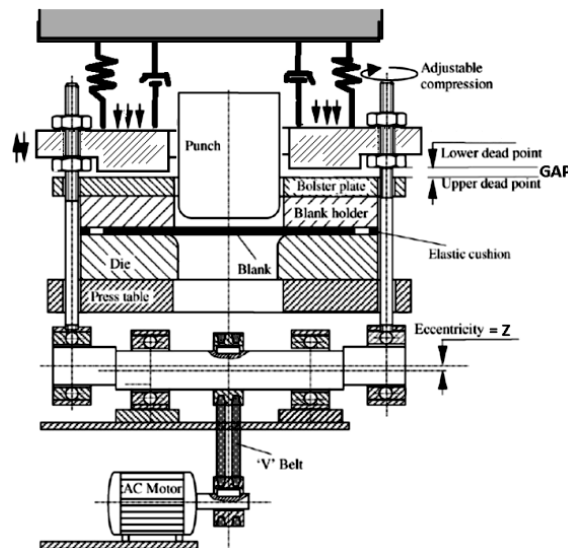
Scheme of deep drawing machine using application of blank holder with anti lock brake system [3][4]
